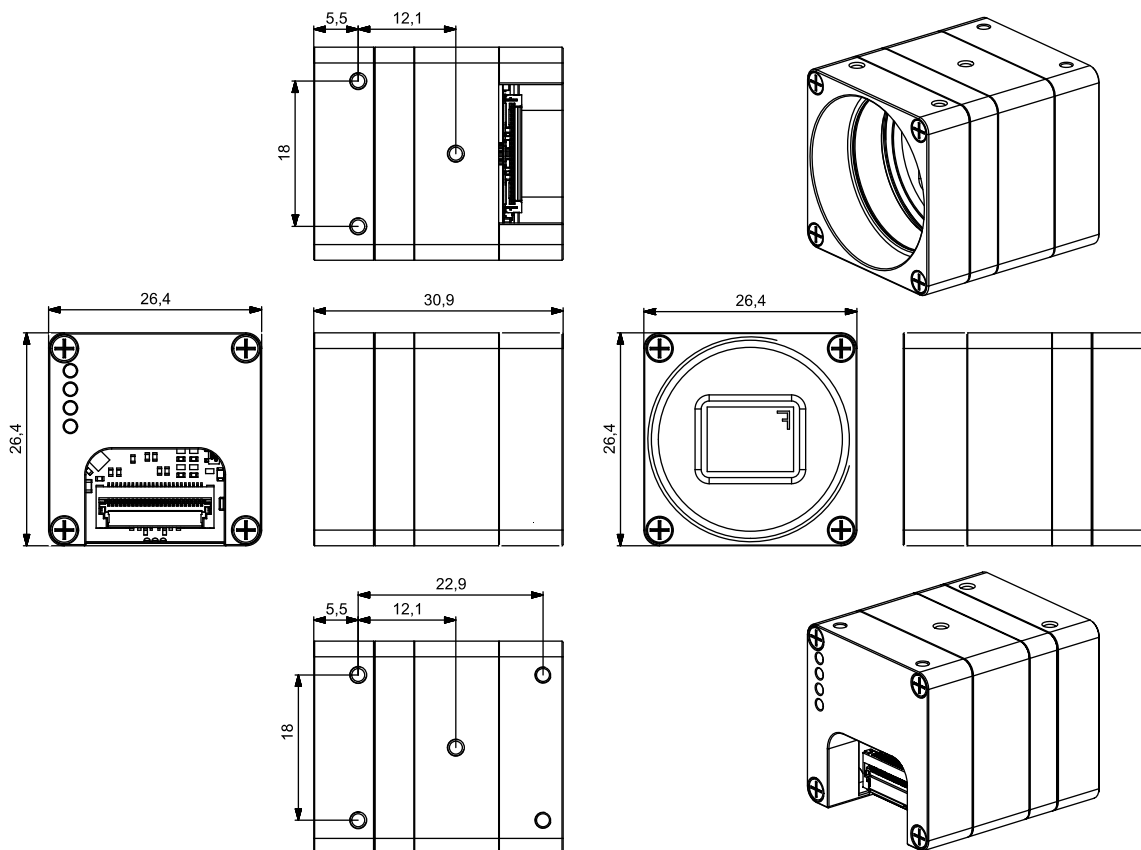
Dimensional drawing of MX023xG-SY-X2G2-FL (C-mount (with C-mount module B))
